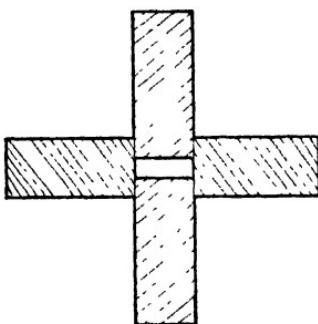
HOW FLEX GROOVE IS FORMED IN THE THIRD DESIGN.
